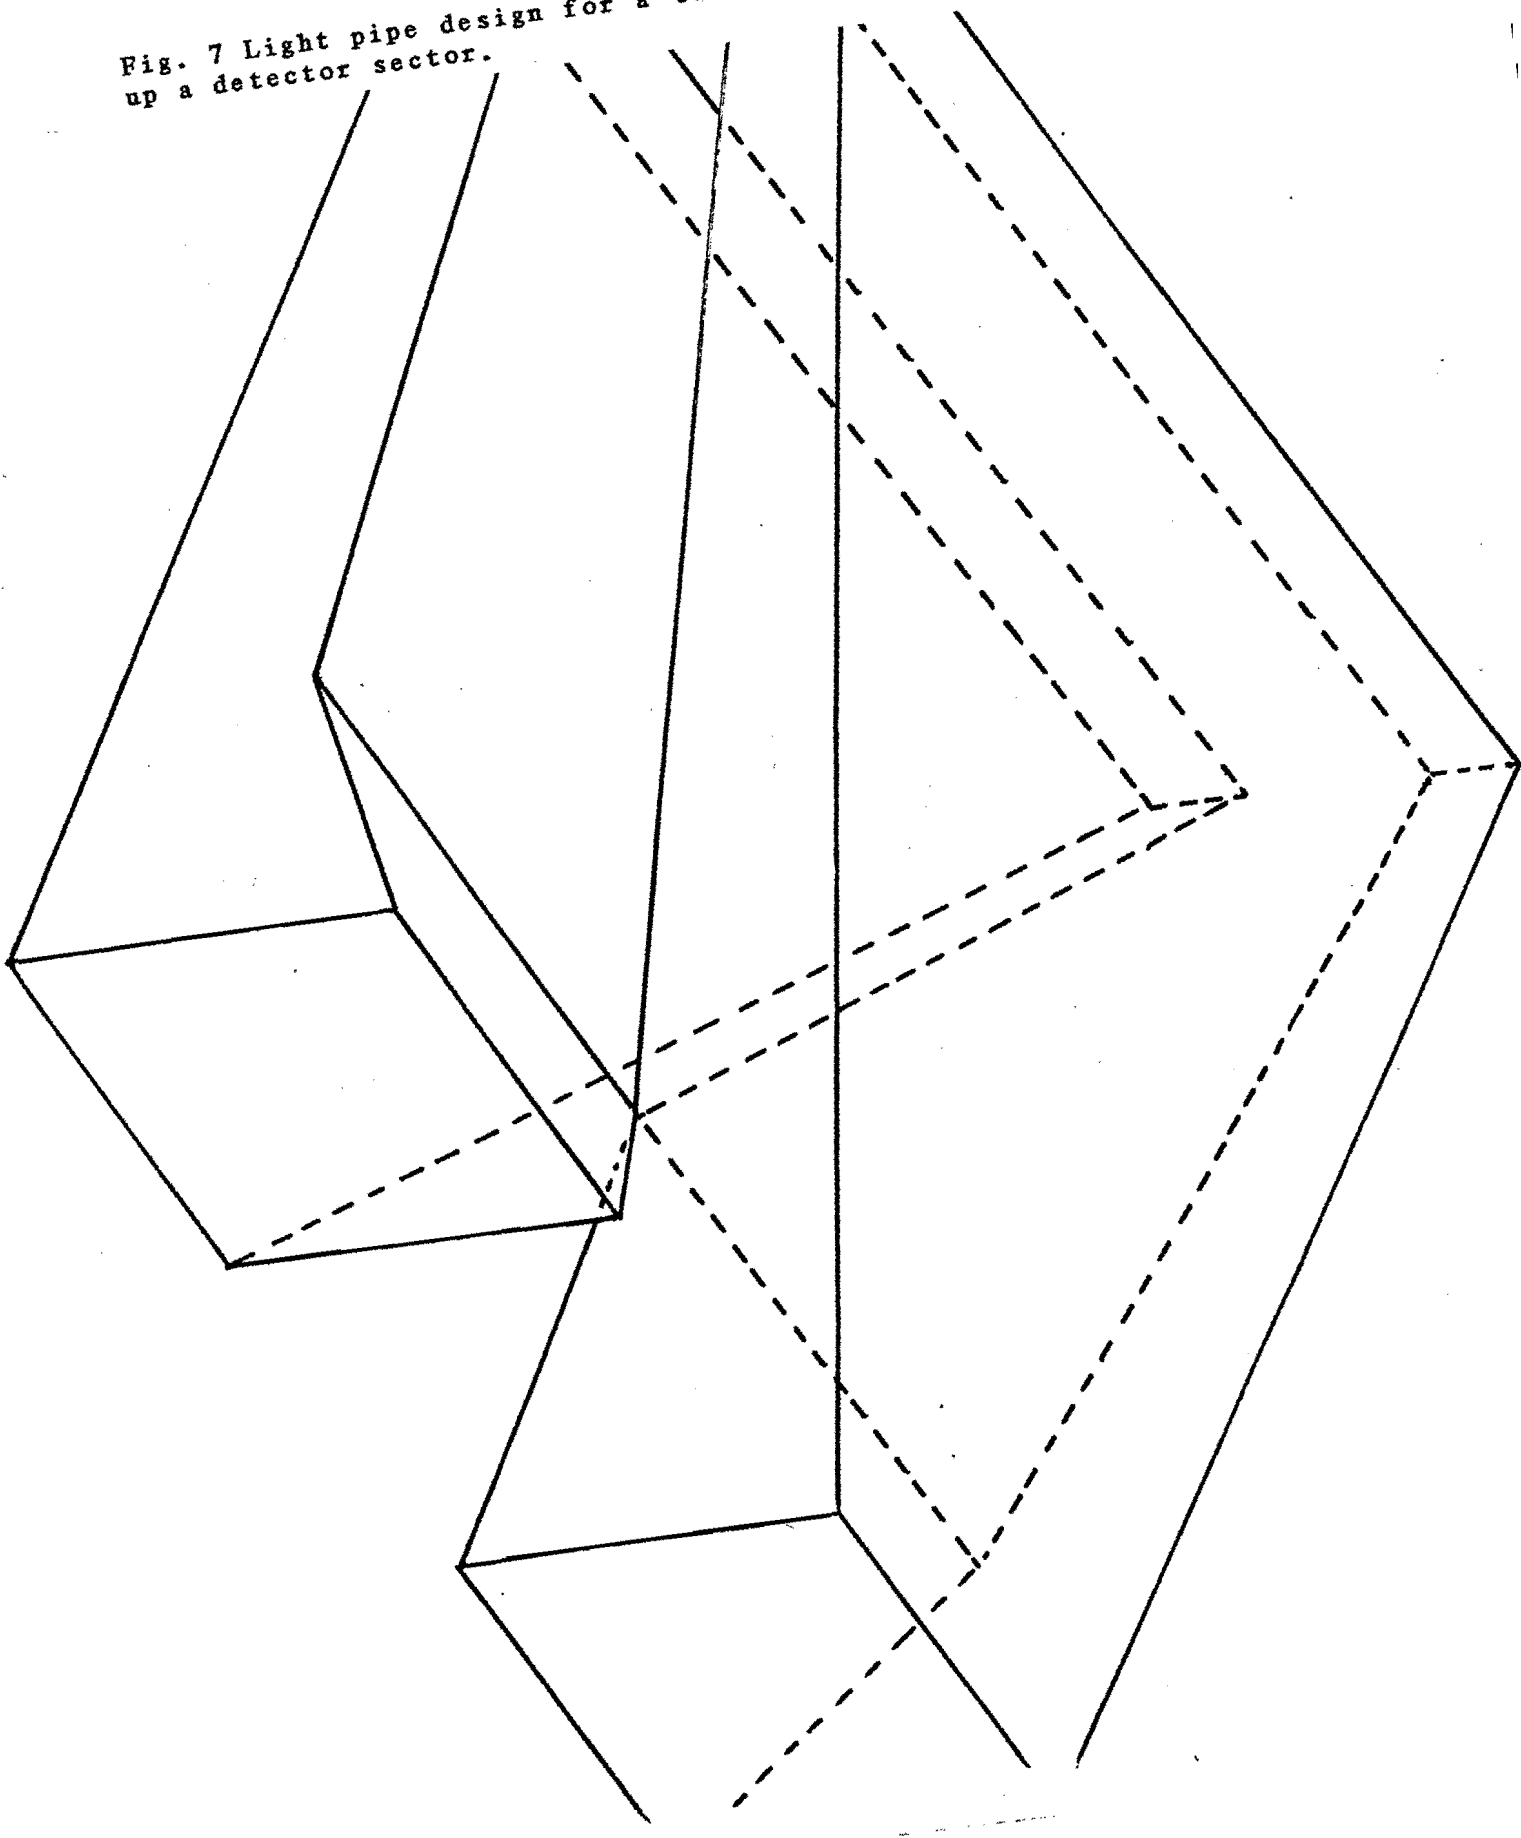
Light pipe design for a two-scintillator package making up a detector sector.
